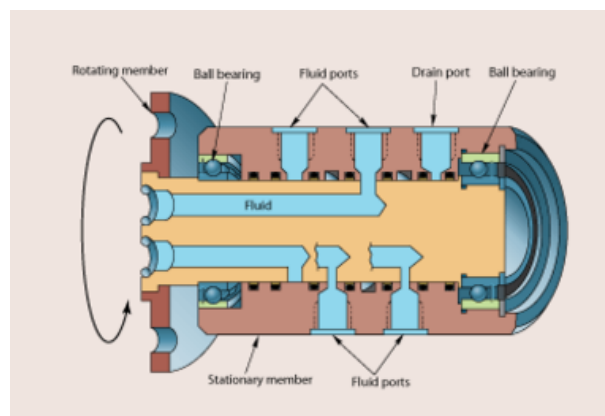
Section view of rotary union depicting fluid flow between a stator and rotor [13]
